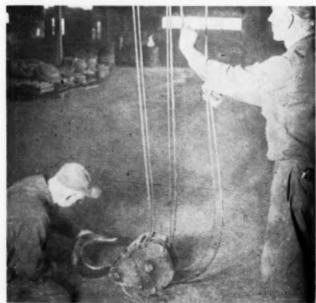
Crane hoisting cables and loading blocks are inspected weekly for damage or wear.
